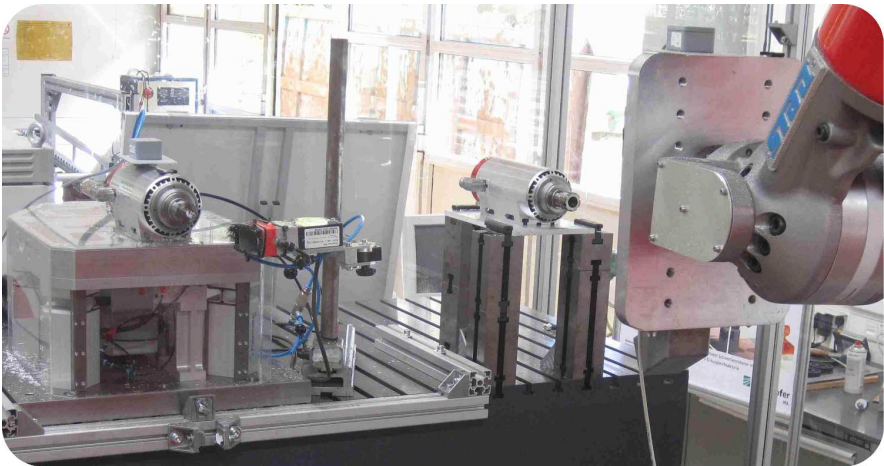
The prototype experimental setup at Fraunhofer IPA, Stuttgart, Germany, for online compensation of position errors during machining tasks. The workpiece is held by the robot and the milling spindle is attached to the micro-manipulator. A close-up of the micro-manipulator, as seen from the opposite side, is displayed to the right in the figure. Figure originally published in [Olofsson et al., 2011a].
